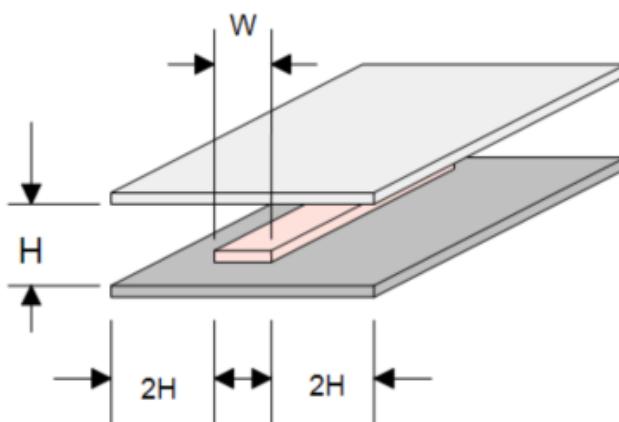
The Complete Structure of the Multilayer PCB Strip Line
